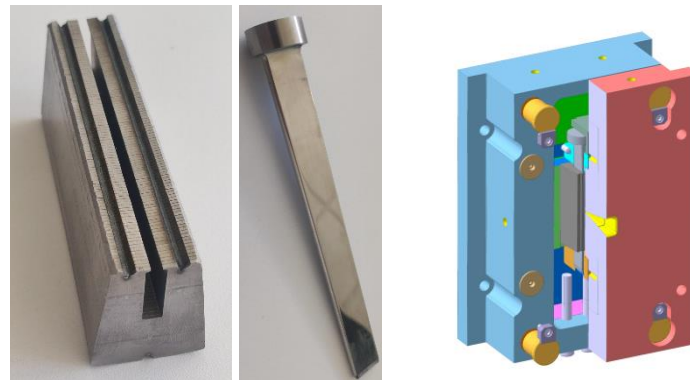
Slot test specimen and core for insulation layer molding (left) and transfer molding tool (right)
